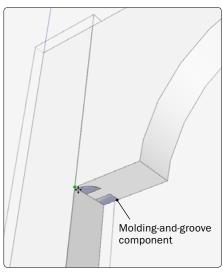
The molding-and-groove shape for the inside edge of the door parts.
